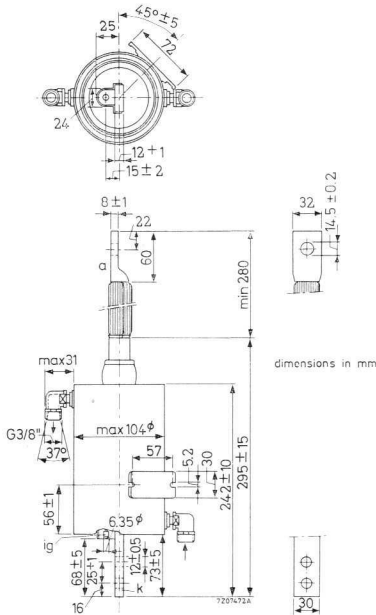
Mechanical diagram of type ZX1062 ignitron.
